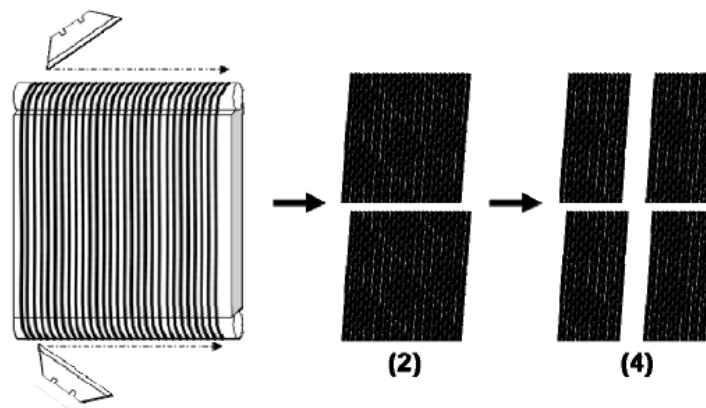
Schematic of the cutting and arranging process of pre-preg in flat specimen mold (Sollenberger 2010)
